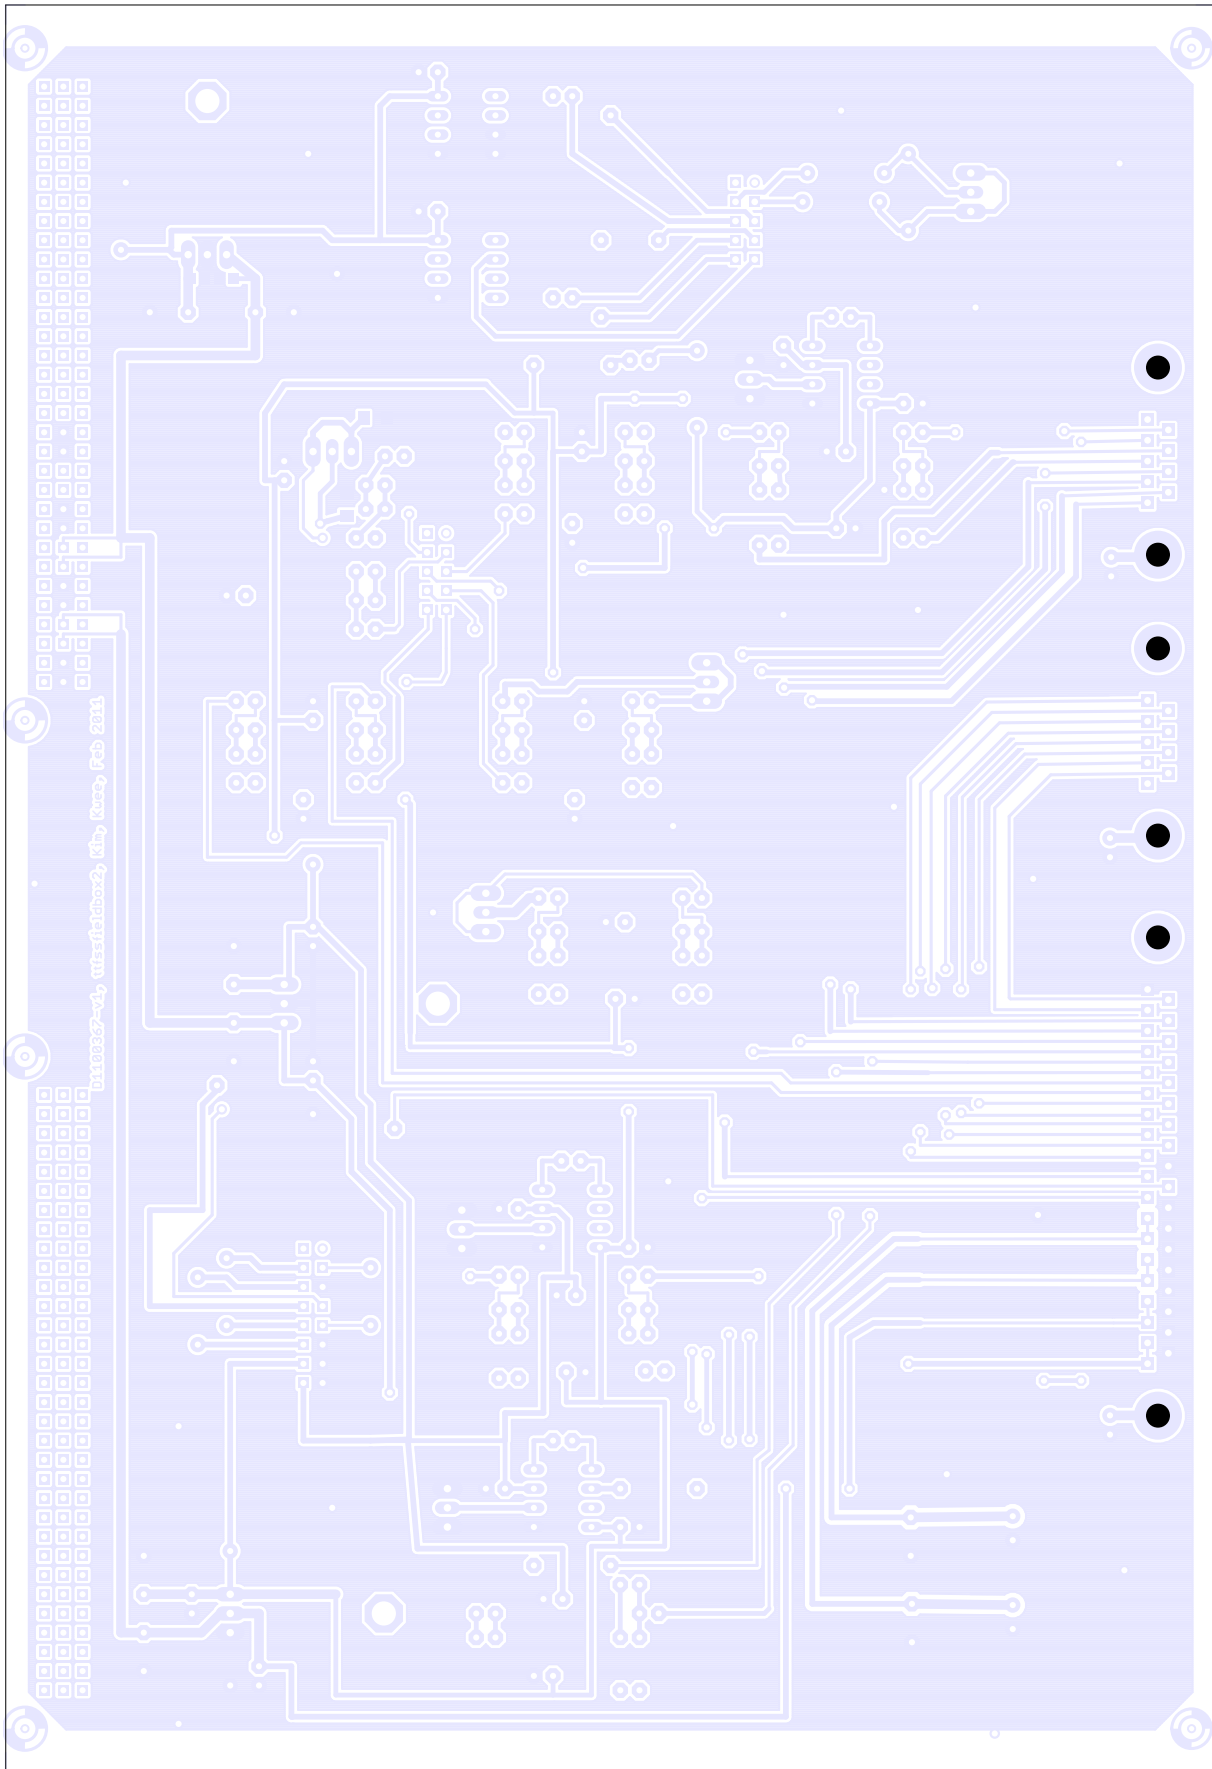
Board bottom view showing drills with 3.2 mm (0.125 in) diameter
